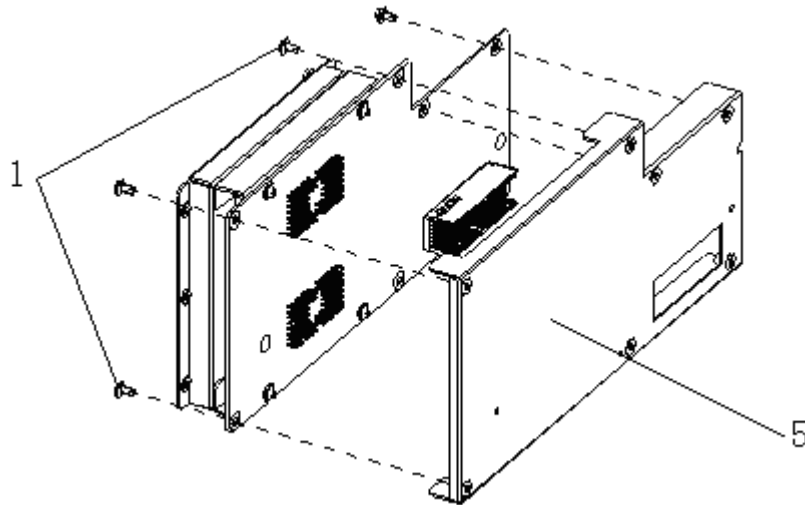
Sketch Map of Probe Board and Mian Board Disassembly (6)
